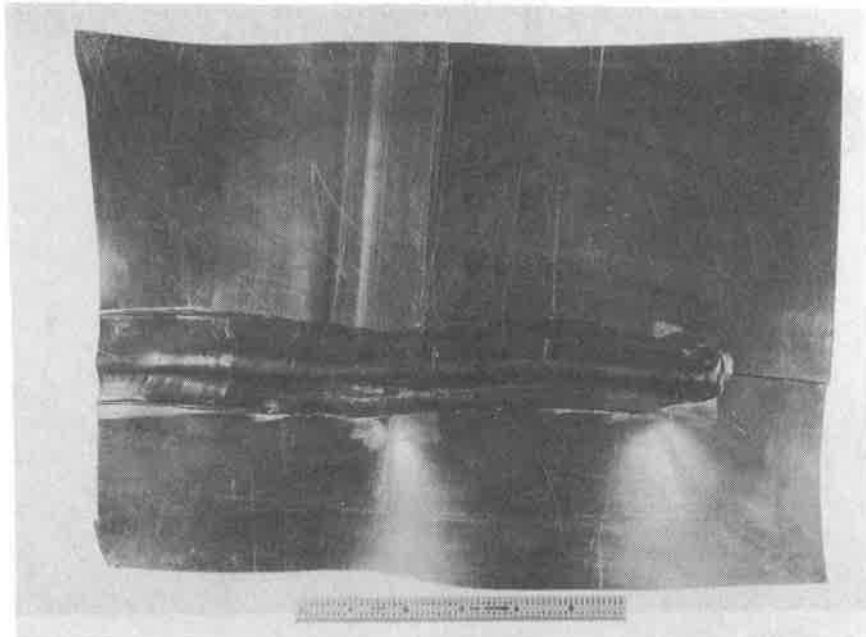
TOP VIEW OF AN EXTRUSION FILLET WELD AT THE INTERSECTION
